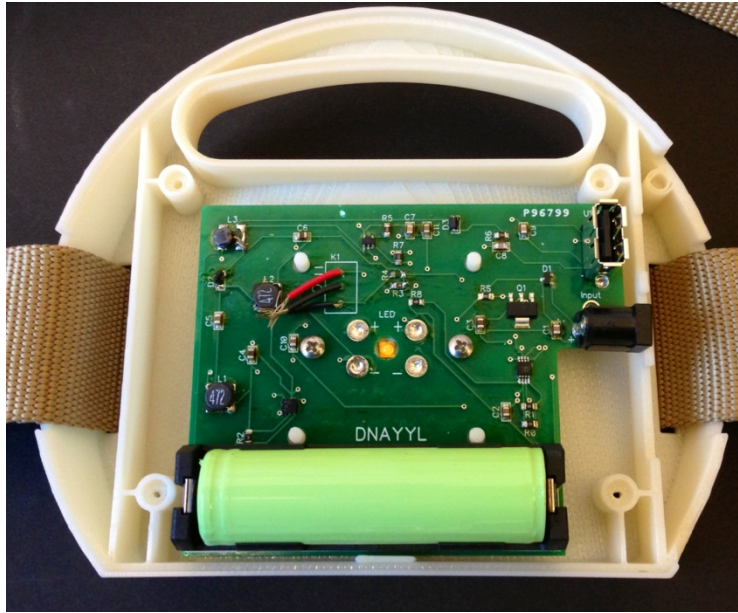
PCB installed into the 3D printed back part to check the fit. Port holes do not align with the ports therefore small refinements are still necessary.
